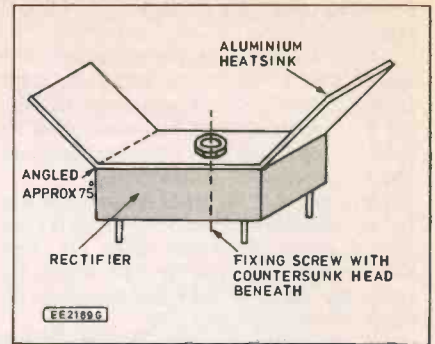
Mounting the small (76mm x 25mm) 16 gauge aluminium heatsink on the bridge rectifier.
